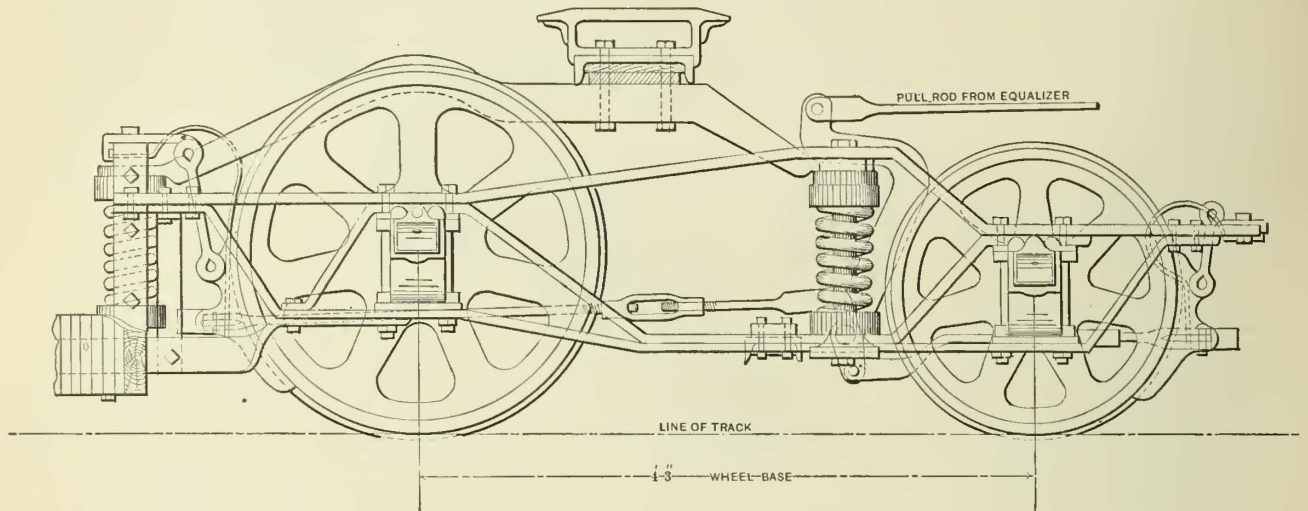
SIDE ELEVATION—NEW MAXIMUM TRACTION TRUCK.
